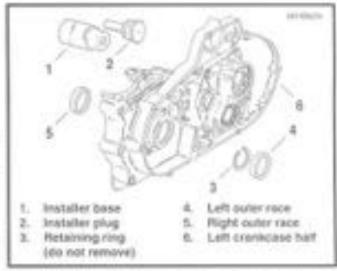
, Installing Sprocket Shaft Bear Outer Races
